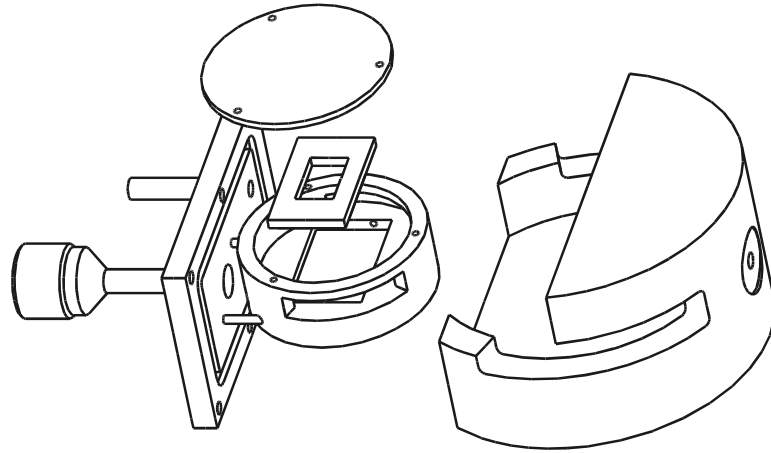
View of the sample inner (left) and outer oven (right) used in the experiments. The holder is also shown.
